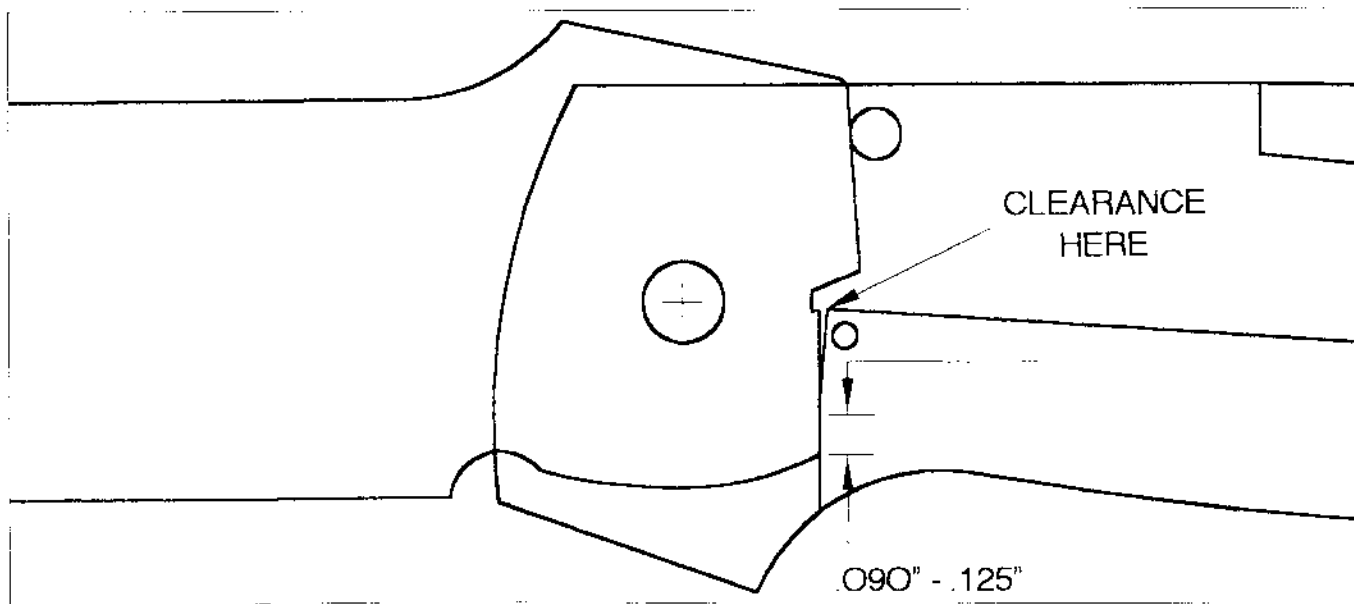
The blade/spring contact should not be a sharp point but rather a small surface of about .090-.125" with clearance at the top of the lock.
